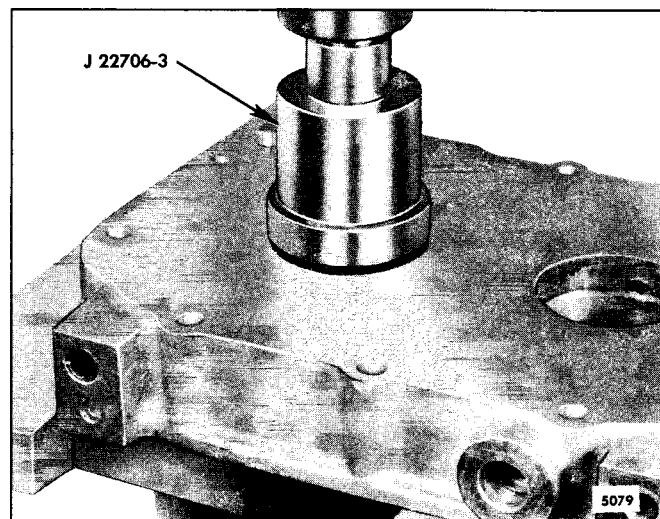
5 - Installing Oil Seal Ring Collar in End Plate using Tool J 22706-3
